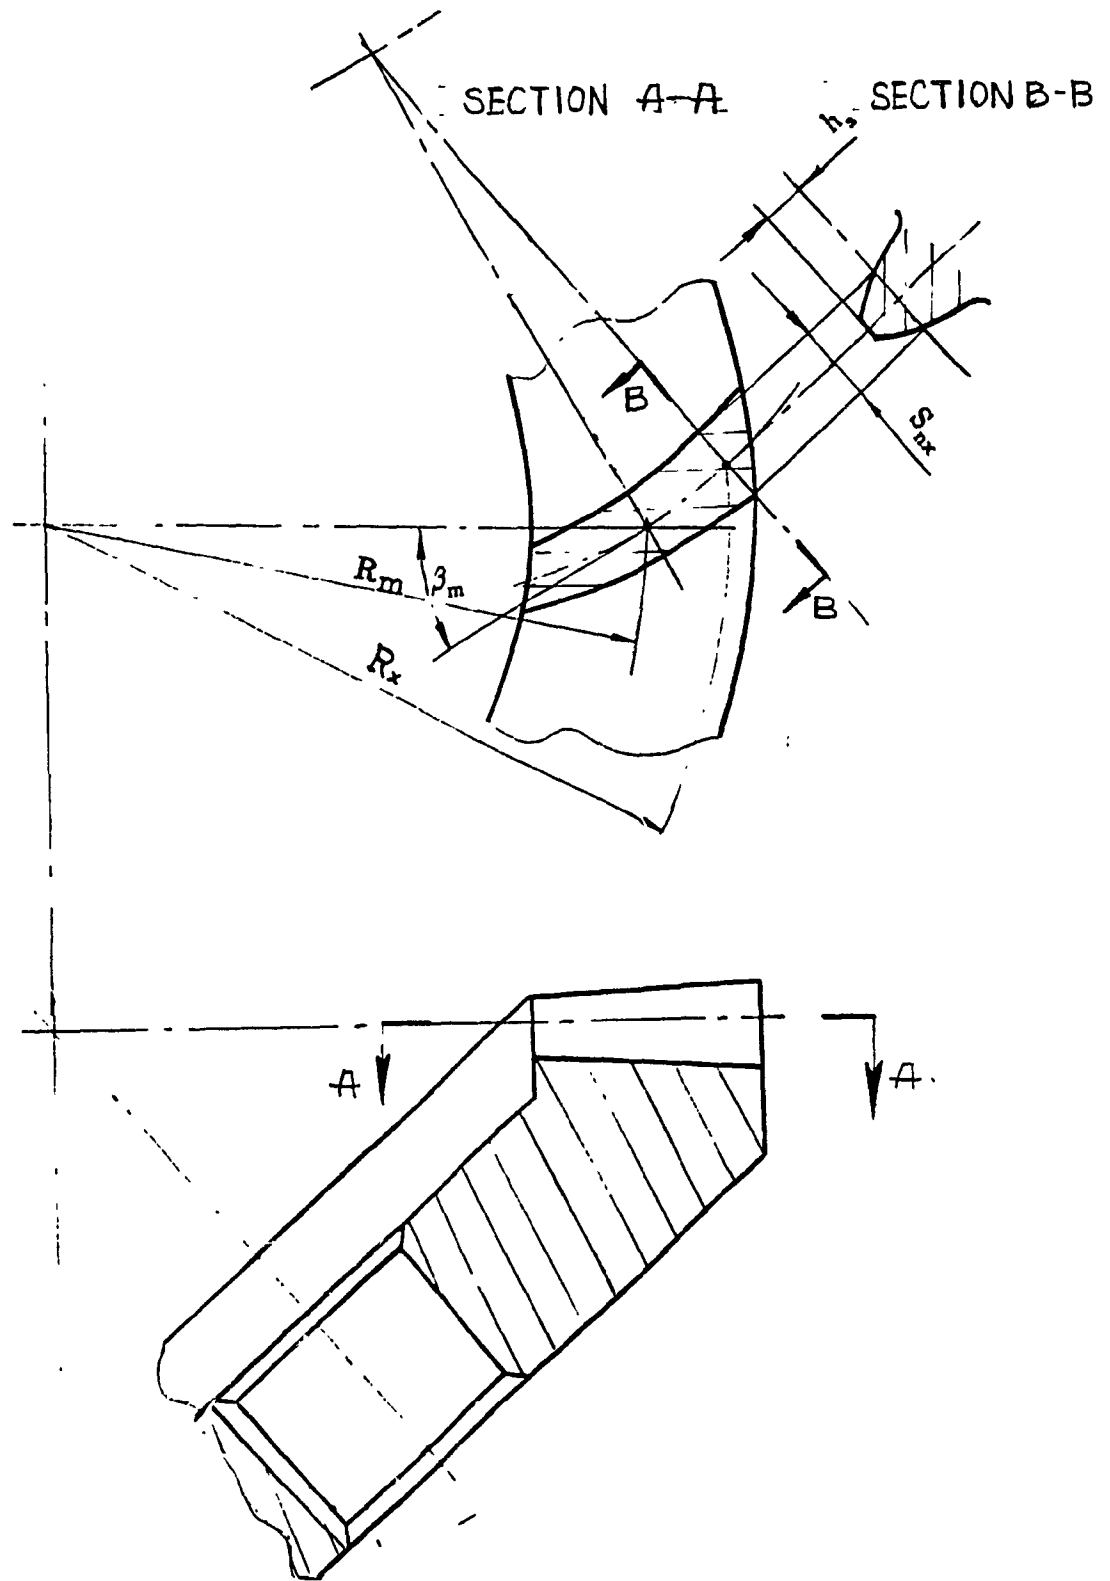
The Measurement Dimensions of Spiral Bevel Gear
